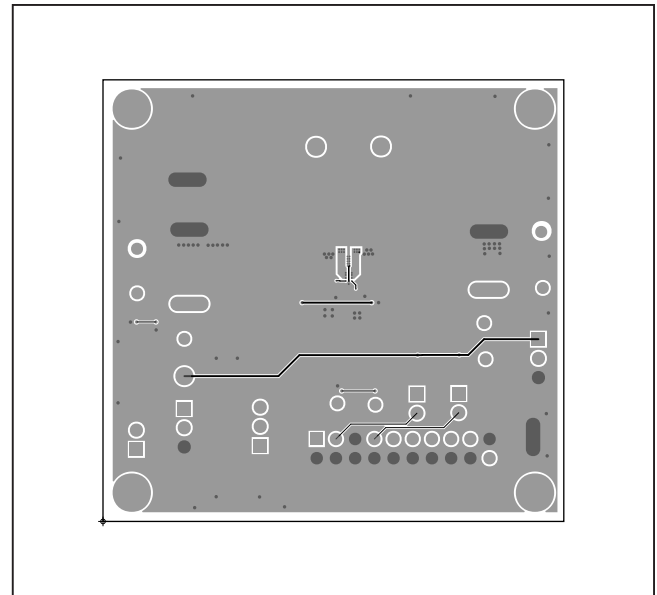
MAX77801 EV Kit PCB Layout—Top Side
